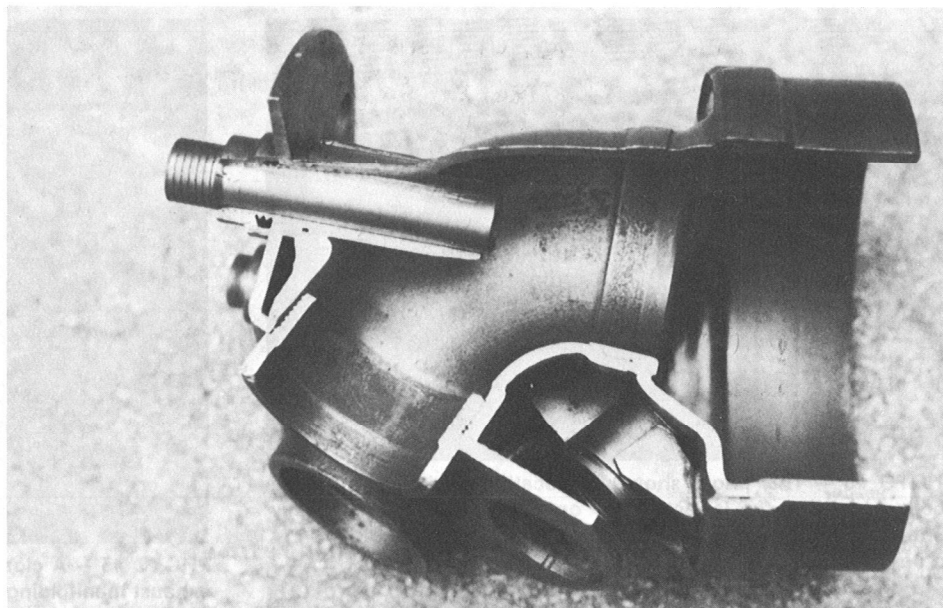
A cut-away model of the fabricated Corvair cylinder with integral cylinder-cylinder head. Actual cylinder has been cut off but would extend about five inches to the left. The curved exhaust passage may be seen. Note the valve guides and spark plug boss. Entire assembly is made from formed metal parts which have been welded (furnaced brazed) together. Outer water jacket (not shown) then encloses this fabricated assembly. (Bob Helt photo)
